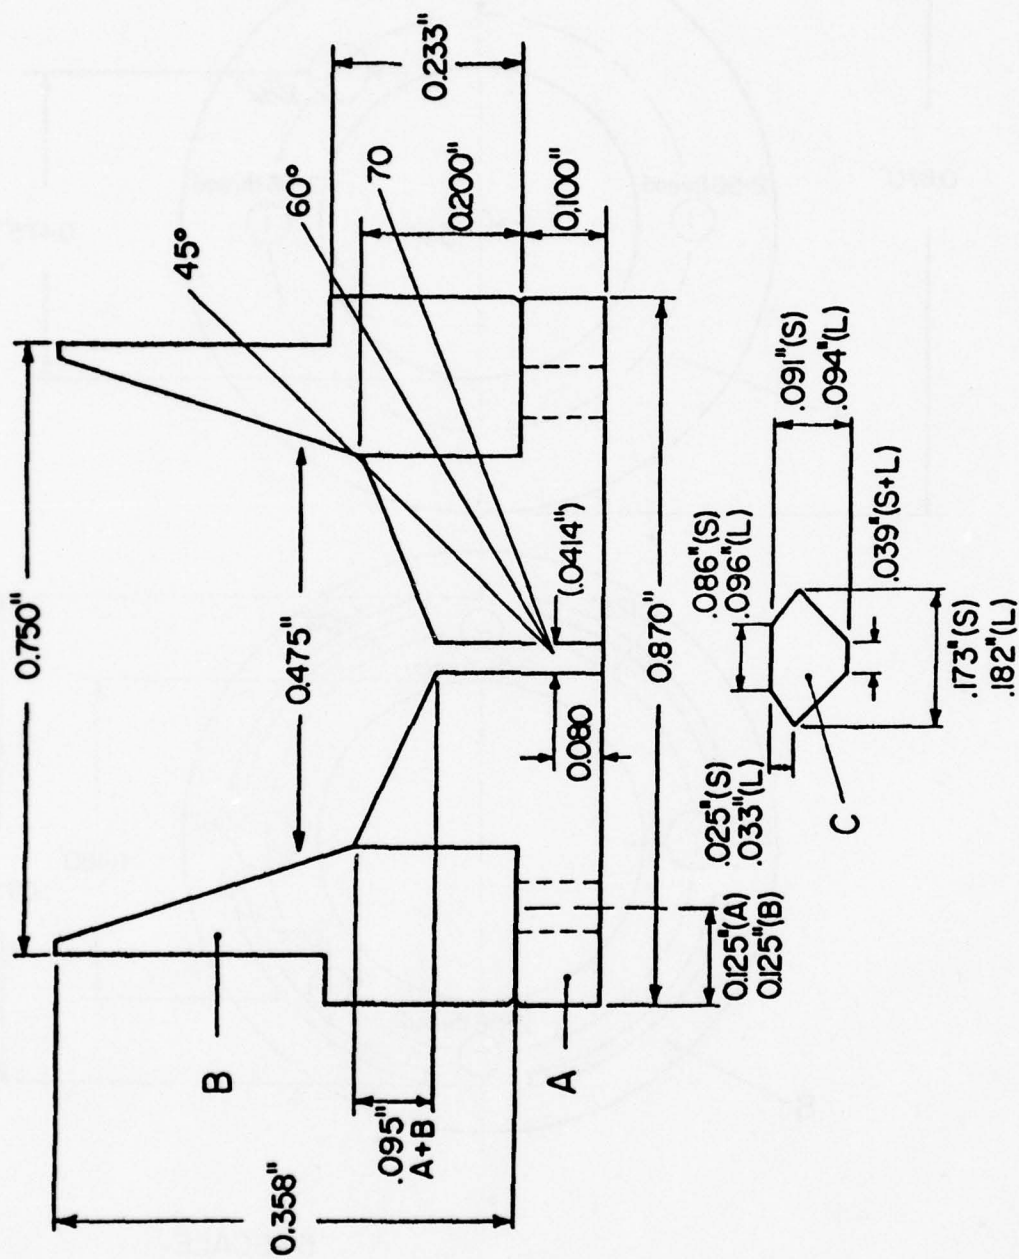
Cross-Sectional View of the Diamond Support Plate A, and Alignment Chuck B
